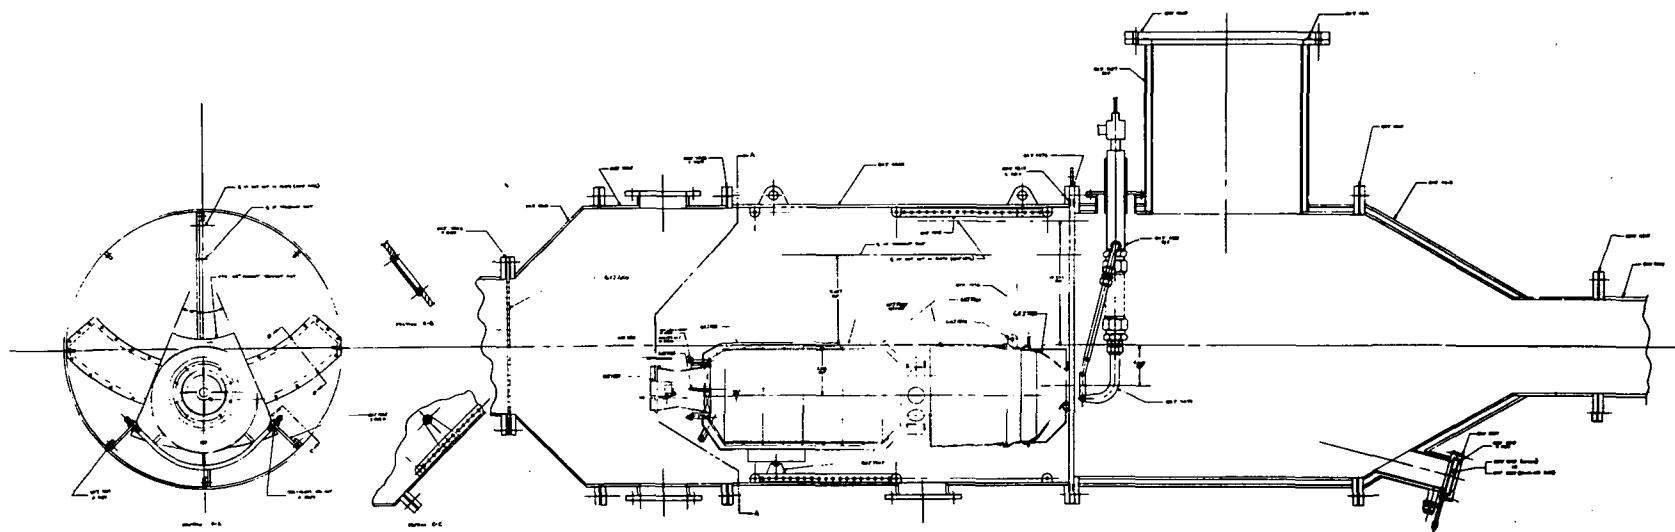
Layout of the B-2 Rig Showing the FRT Combustor
